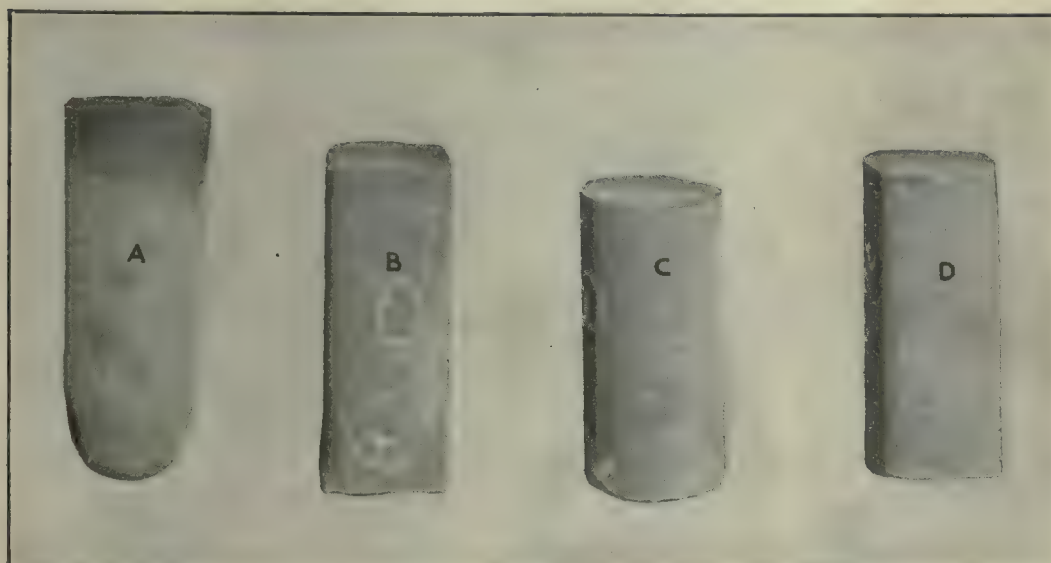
A CAST AND THREE BAR-FORGING BLANKS
